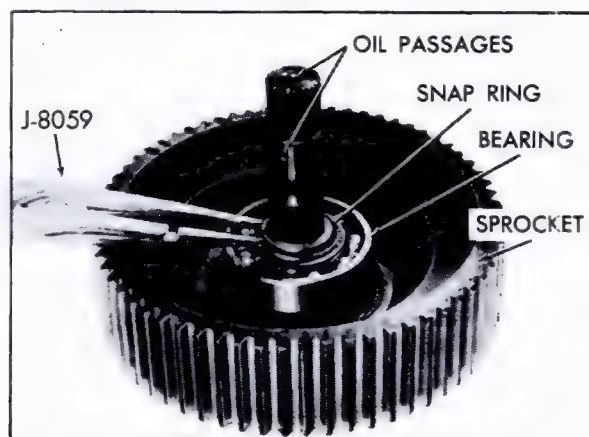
Removing Sprocket Bearing Snap Ring
